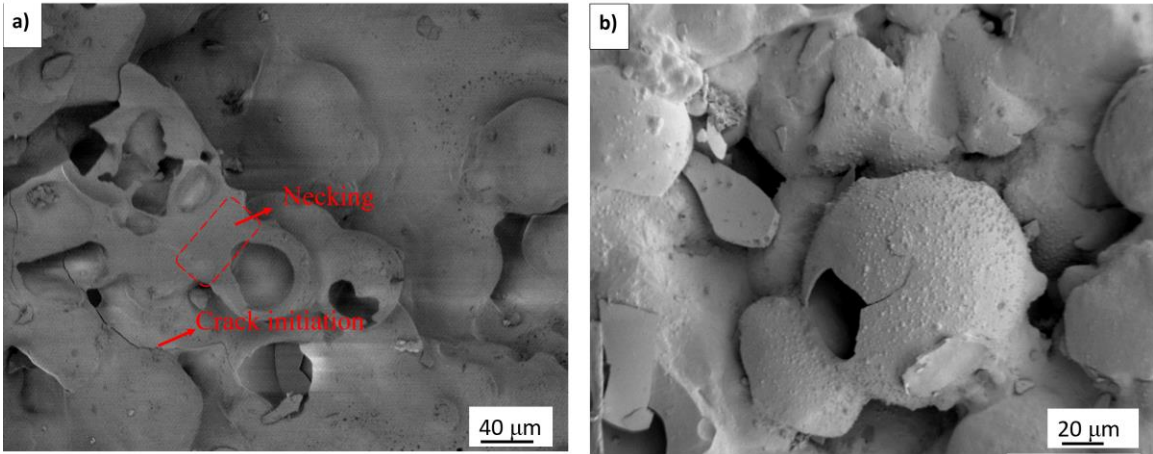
SEM micrographs of fractured samples showing fracture along the sintered spherical particles. (a) The fracture along the necking region. (b) A hollow sphere cracked after sintering.
